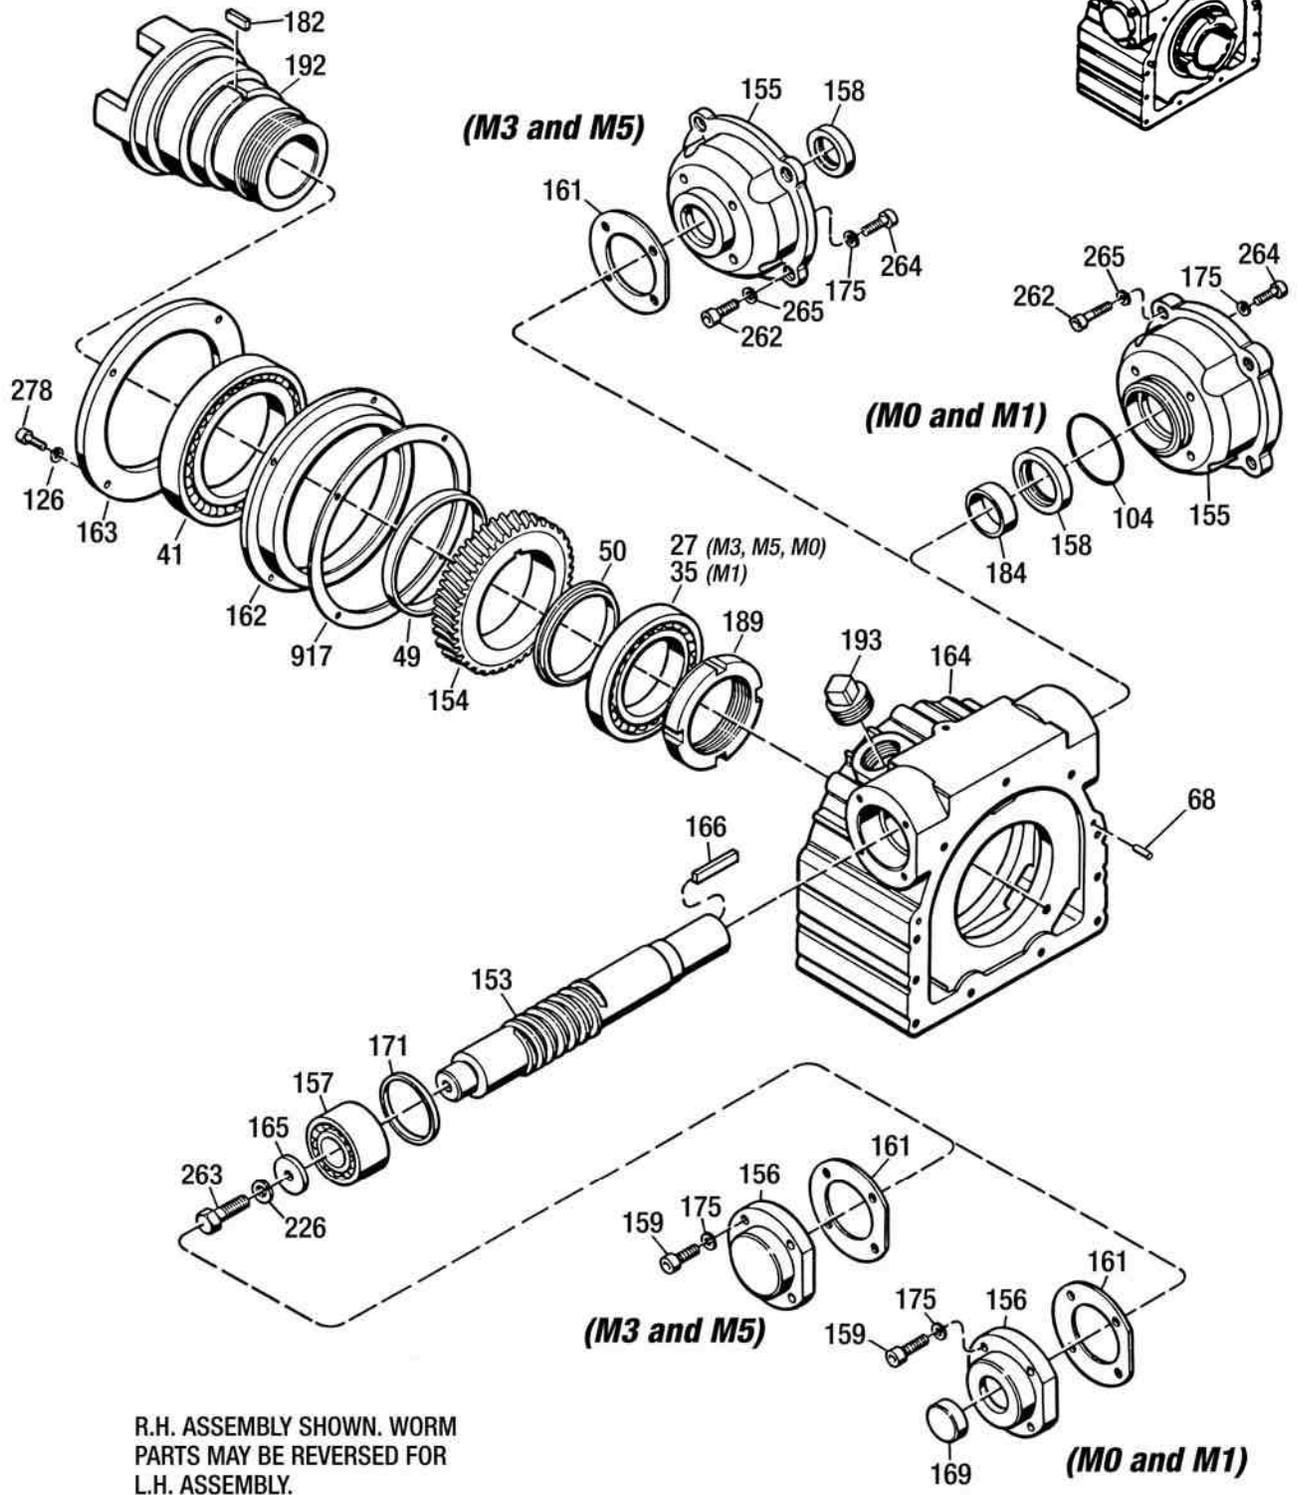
Secondary Input Housing Sub-Assembly (With Quill Input Shaft)
